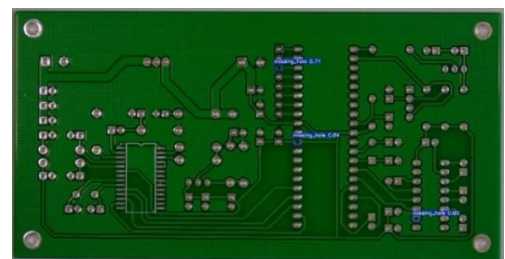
Detected Defects in PCB Using YOLOv5
